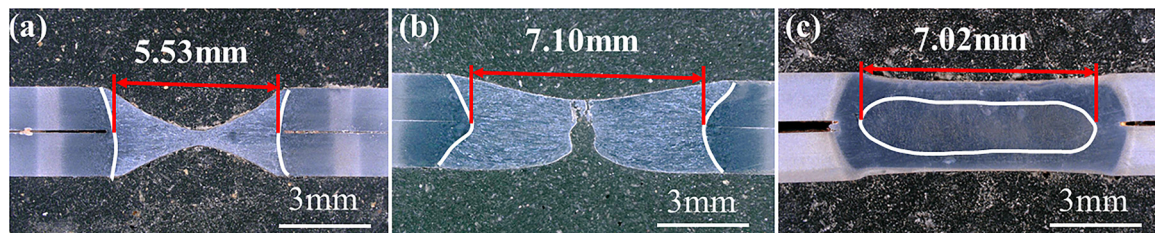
The weld nugget size of the interface achieved by (a) conventional LSW process; (b) novel LSW process and (c) RSW process.
